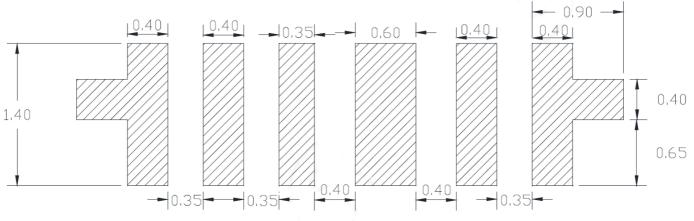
IN-PI4818QAS5R5G5BPW Package Outline Dimensions
